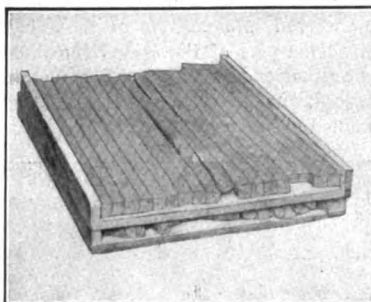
TRUCK PLATFORM FULL OF CLAY LUTING STRIPS
